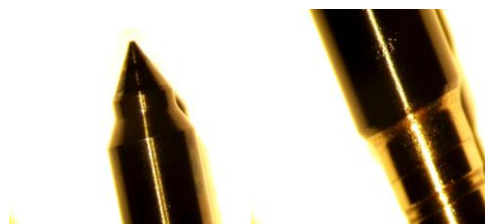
a) a fuel injector needle tip, b) a plunger and barrel assembly element of fuel injector needle
